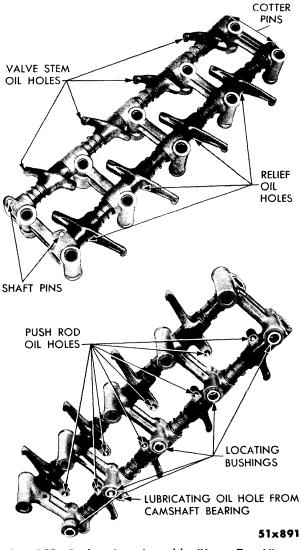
Rocker Arm Assembly (Upper-Top View; Lower-Bottom View)
